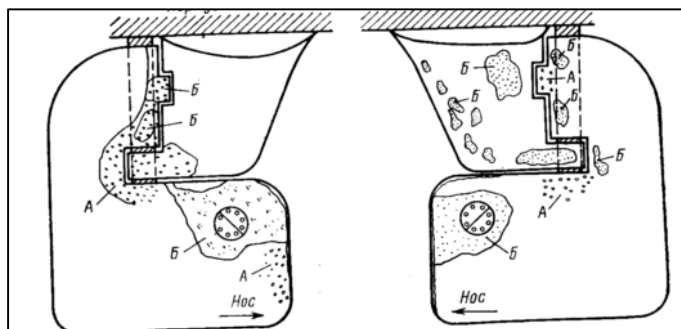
Corrosion damage on rudders. A – point type (0,1 – 0,2 mm/year), B – letter type (0,3 – 1,0 mm/year) corrosion [9]
